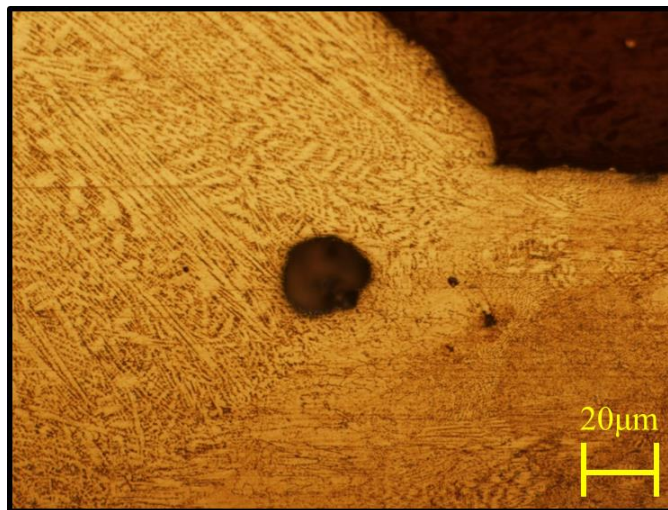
Pore on SLM+EBW sample 19A/B (180.4 J/mm) weld
